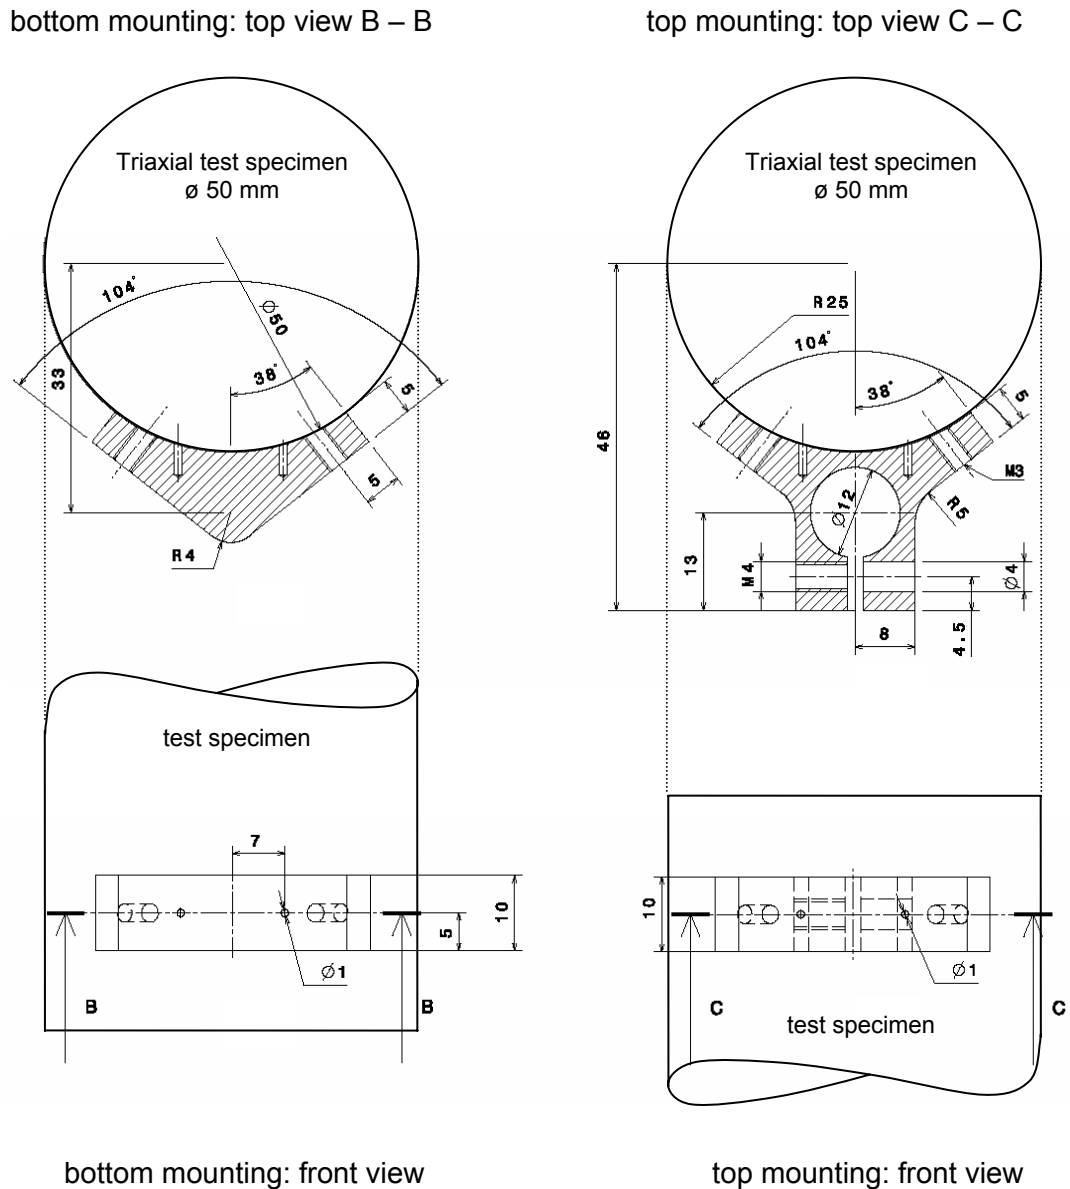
Construction of the bottom and the top mounting plates, dimensions in millimetre, scale 1 : 1 (drawing by A. Zweidler).
